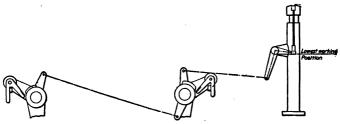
Trip levers touching the cams with governor in lowest working position.
